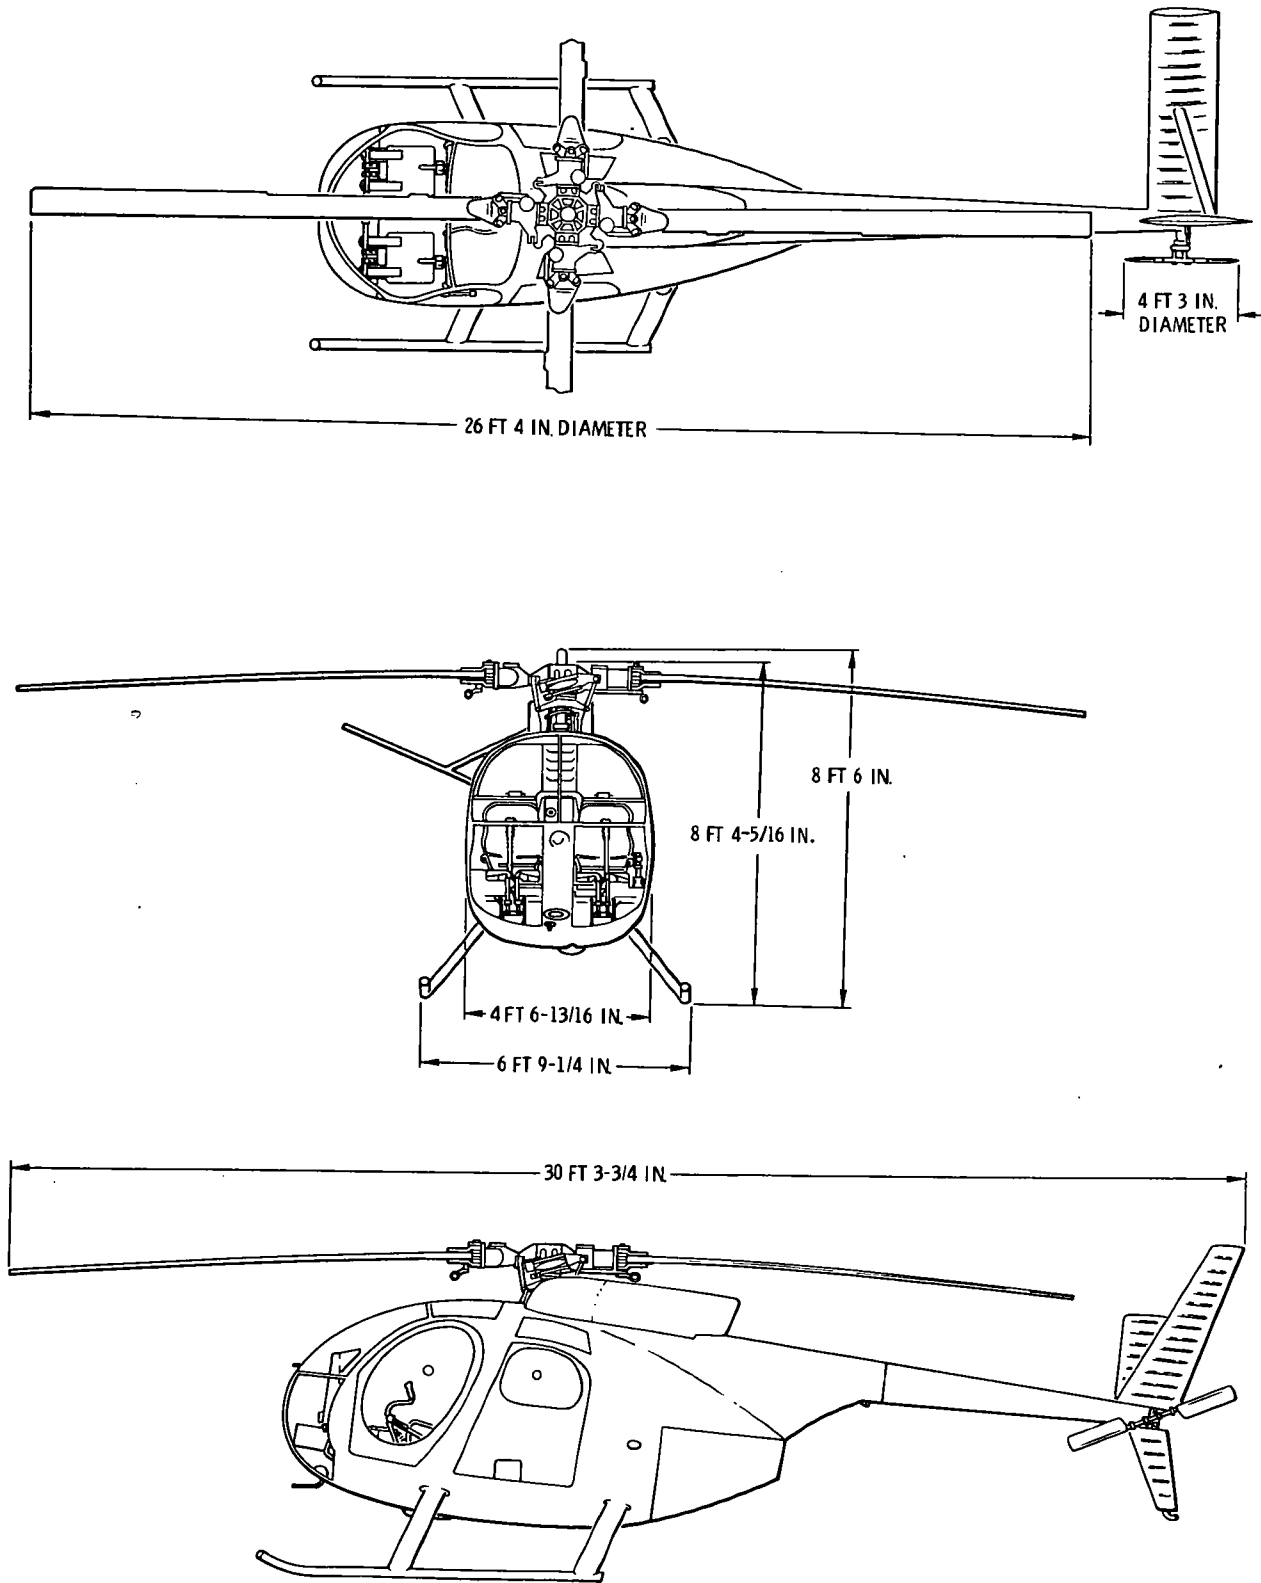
Principal dimensions, OH-6A (Cayuse)
